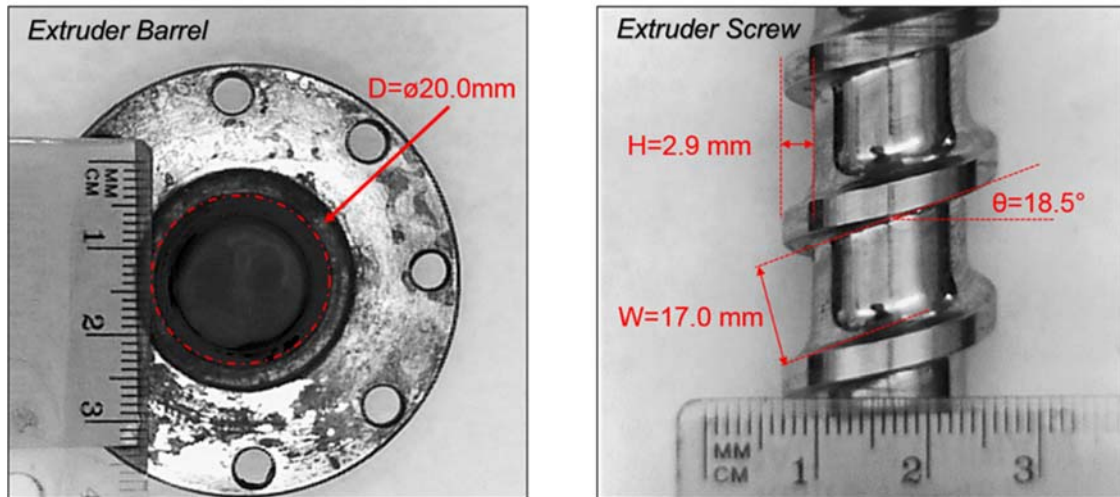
Photographs of fabricated extruder barrel and screw with geometric parameters annotated.
